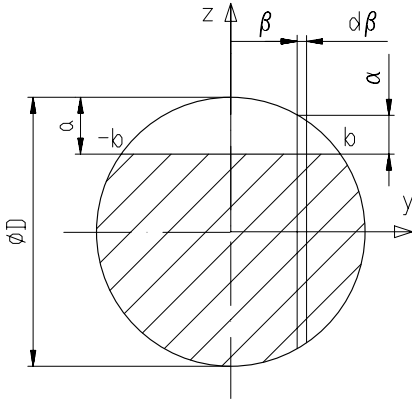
A Cross-sectional drawing of the shaft with the crack
